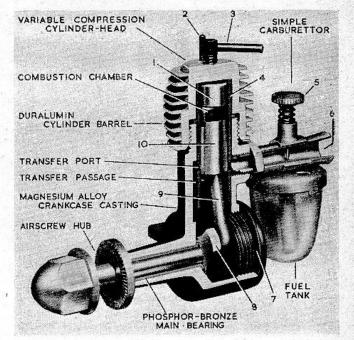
A MODEL AIRCRAFT cutaway drawing of the British Mills 75 diesel motor. In addition to the main features indicated, parts are as follows: 1—contra-piston, 2—compression stop, 3 compression lever, 4—cylinder liner, 5—needle-valve control, 6 air intake, 7—crankcase backplate, 8—crankshaft web, 9 connecting-rod, 10—piston.
